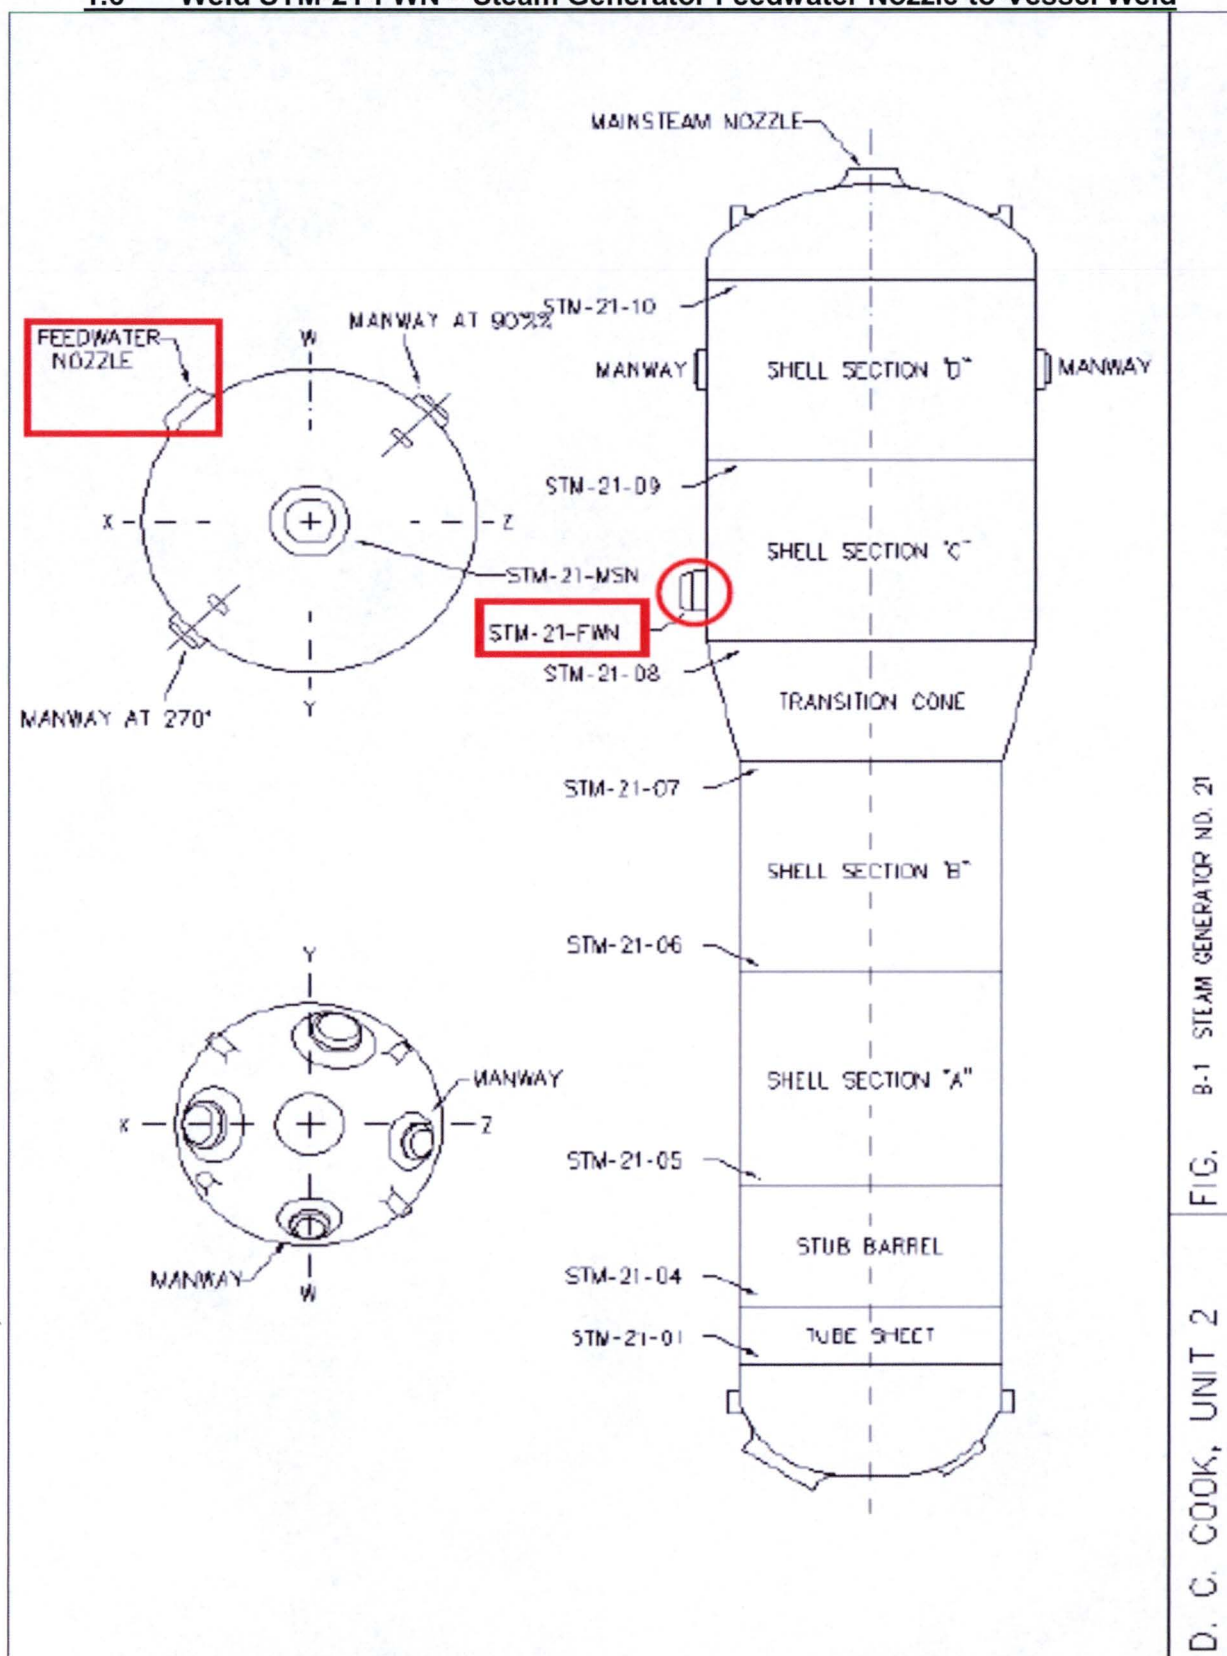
Weld STM-21-FWN (Extracted from Reference DRAWING 2B-1)
